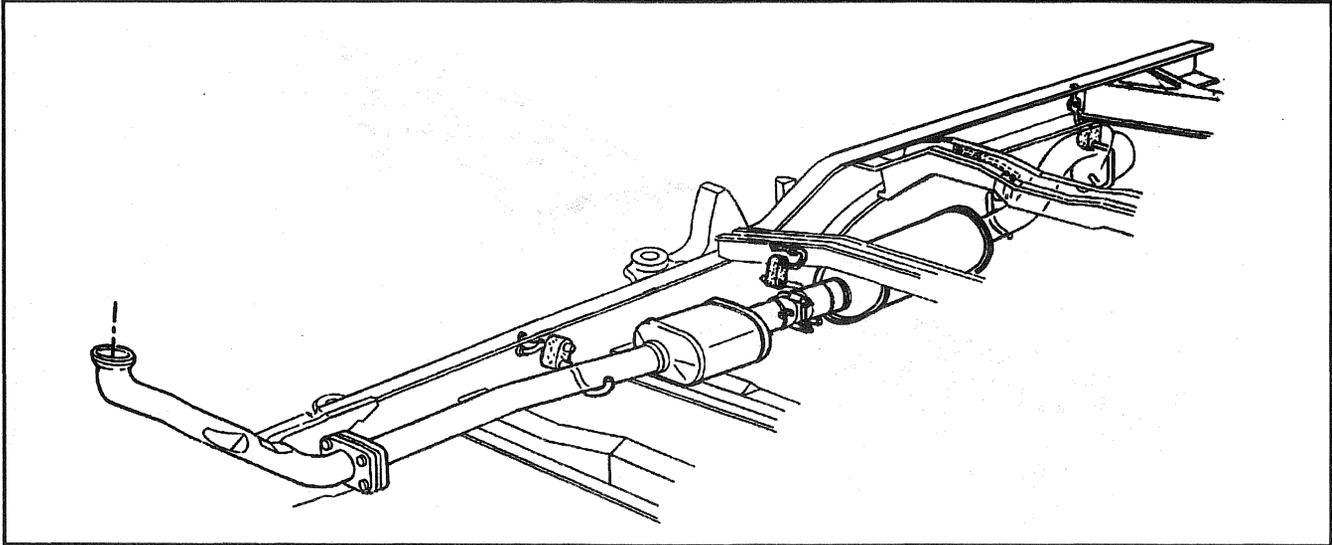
Exhaust System - C/K 2 and 3 Regular Cab w/6.5L Diesel Engine
